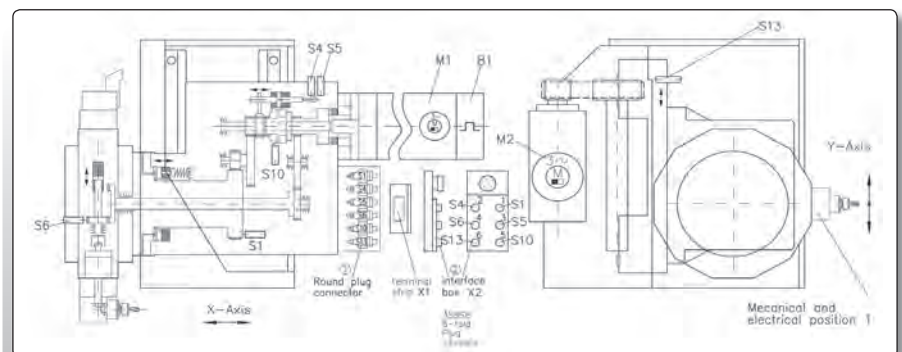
Example of the design of the turret drive [Sauter]
